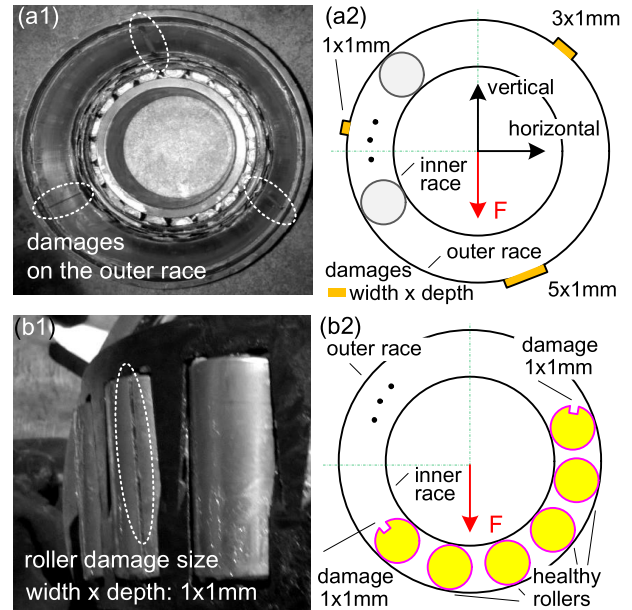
Prefabricated multiple defects on the locomotive bearing and their locations and size illustration: (a1) three outer race defects; (a2) locations and size of the outer race defects; (b1) roller defects; and (b2) size of the roller defects.
